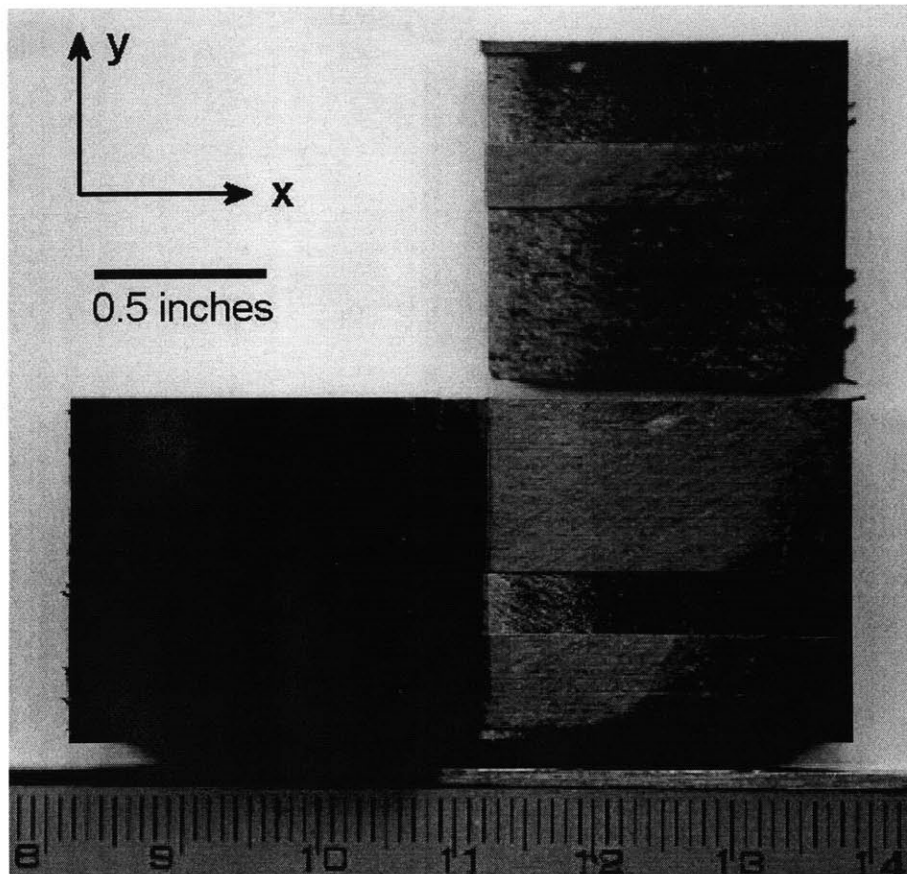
Photographs of $[\pm 30/0]_{10S}$ Specimen 2, tested to failure in “two-dimensional loading”, shown via (*top*) side view, and (*bottom*) top view with delamination surfaces exposed.
